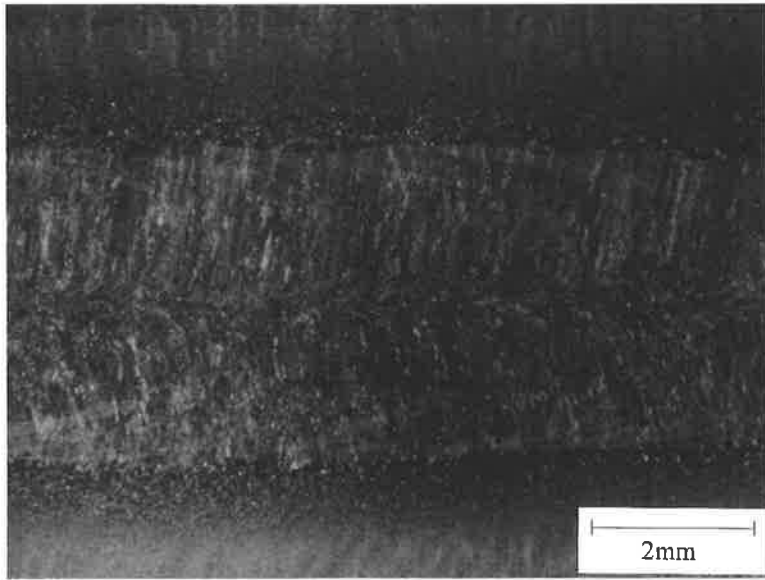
Longitudinal horizontal section of a weld made at 550mm/min and 150A (heat input equal to 0.39kJ/mm). No hollow bead formed in this weld.
